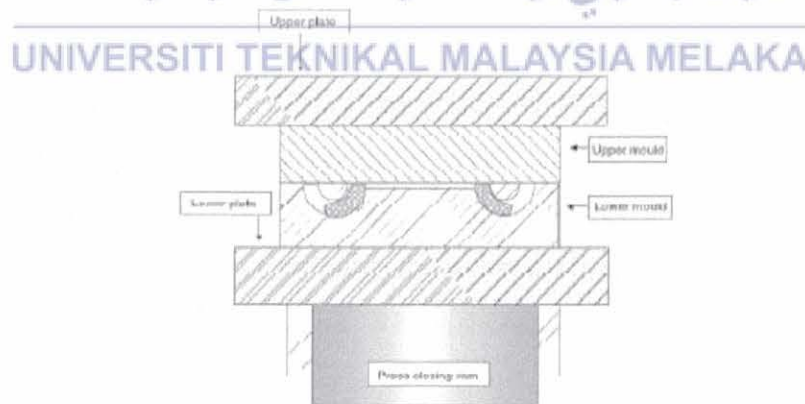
Illustration of Compression Moulding Machine (M. Biron, 2007)
